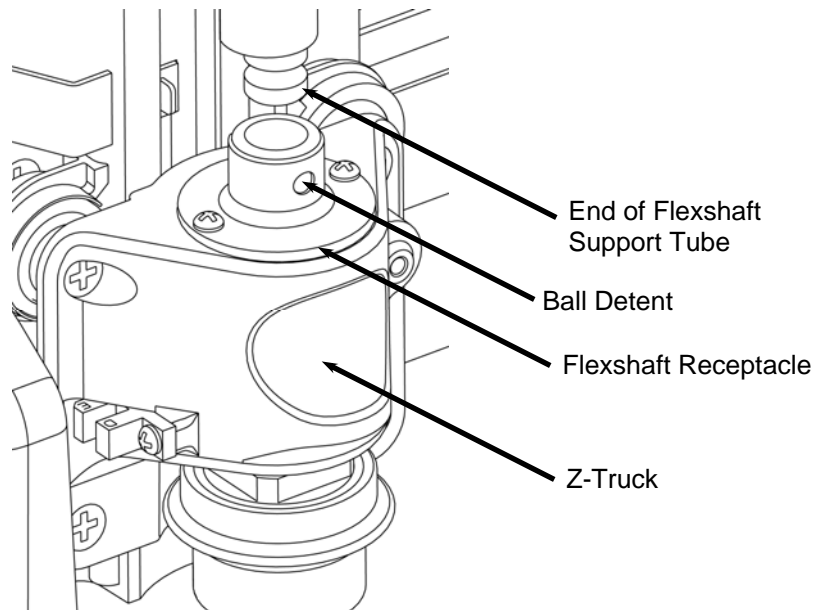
VIEW OF THE FLEXSHAFT CONNECTION TO THE Z-TRUCK
